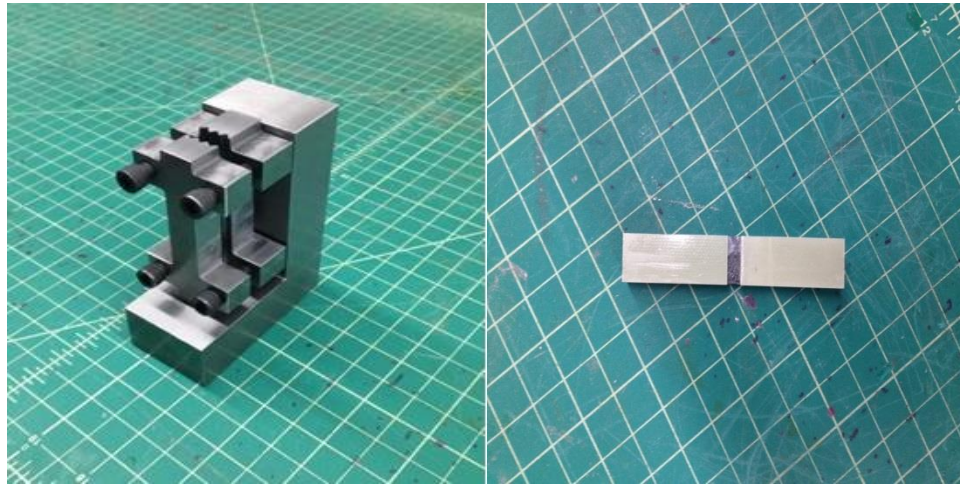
(a) Modified ASTM D 695 compression test-method fixture for CFRT (left), (b) tabbed compression CF/PEI specimen (right).
